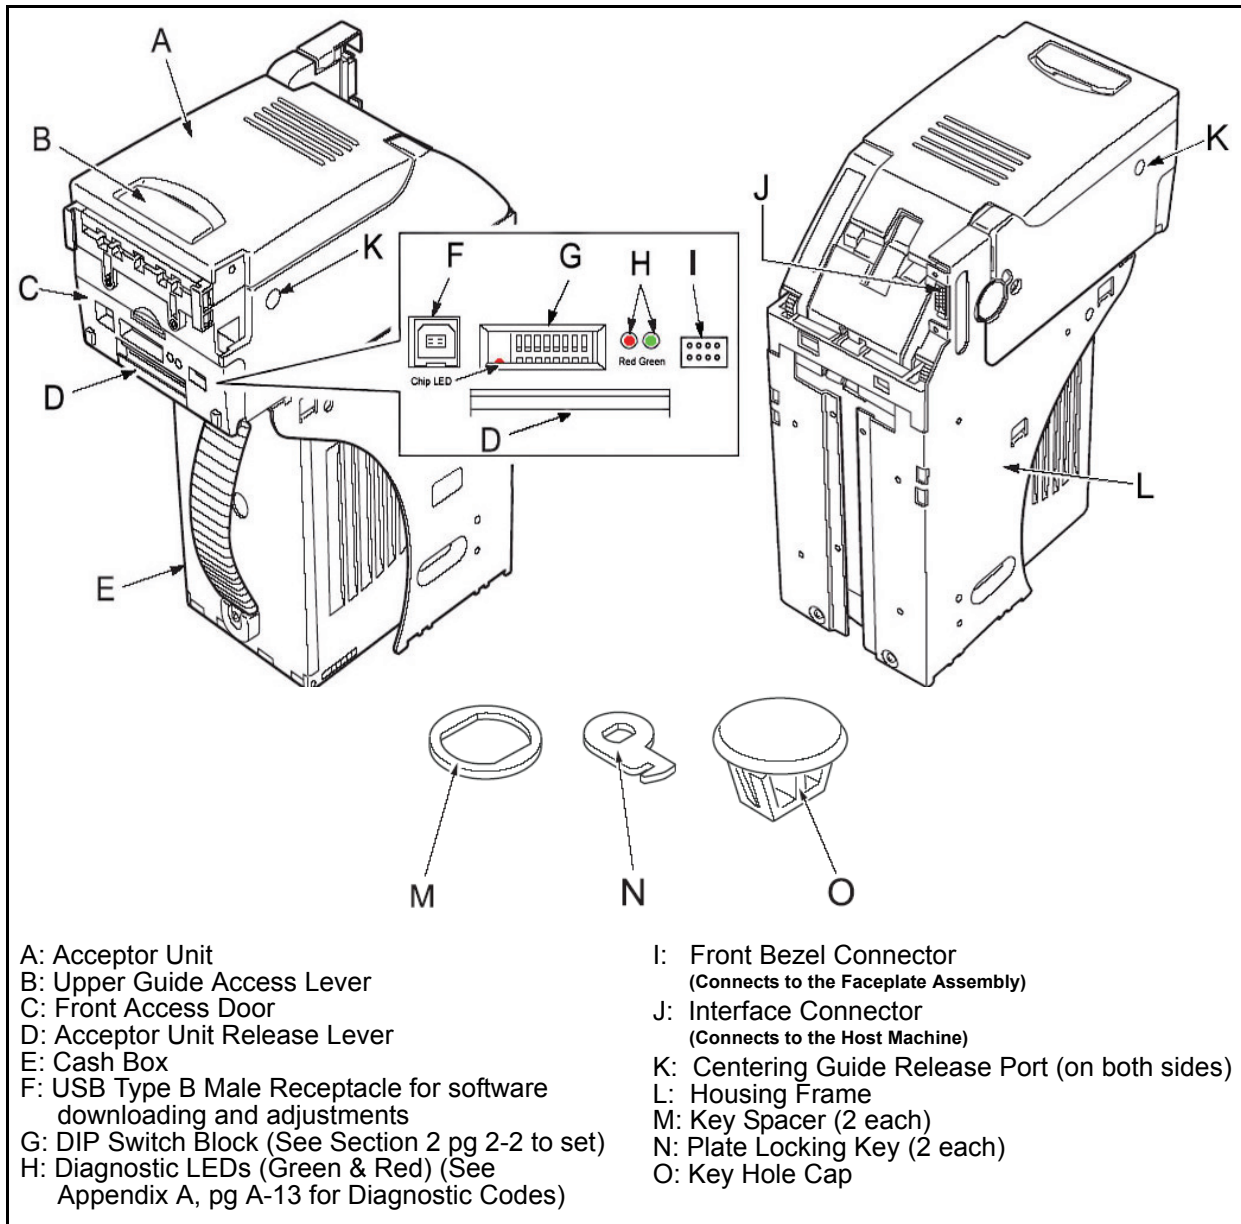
Universal Bill Acceptor (UBA) Major Component Parts
